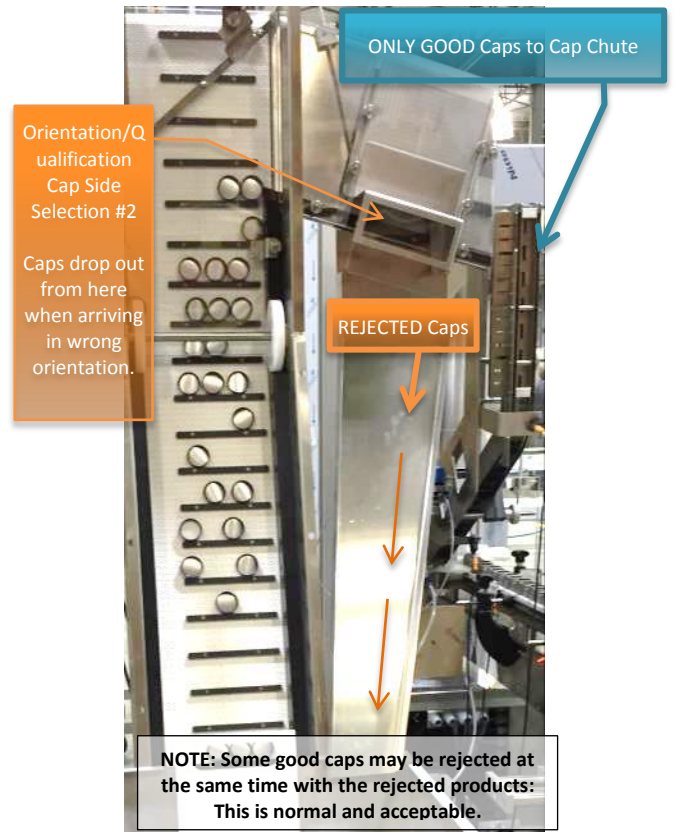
Sorter and Elevator to Cap Side Selection #2
